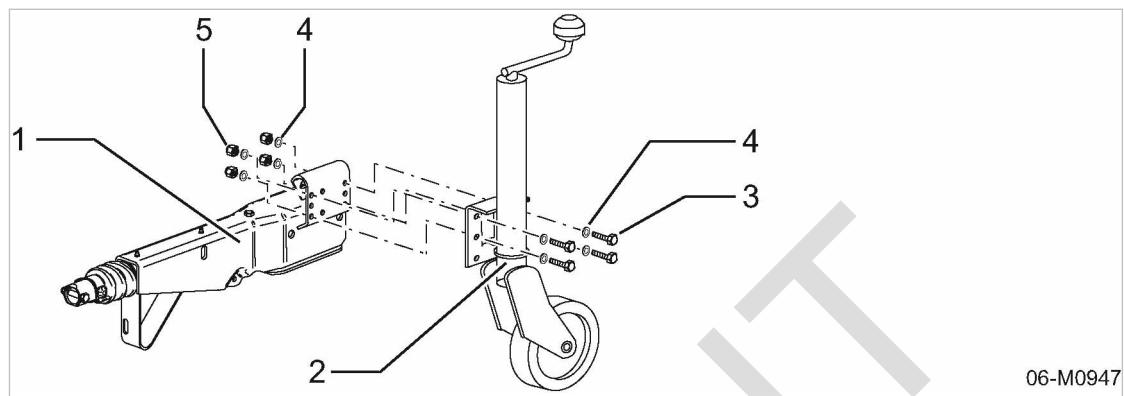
Fitting the jockey wheel of the non-adjustable towbar
